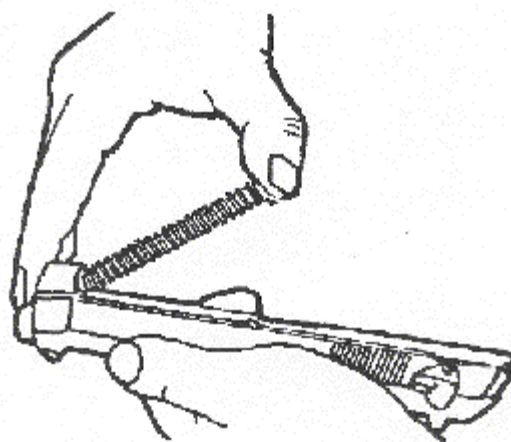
Removing the Recoil Spring and Recoil Spring Guide.
